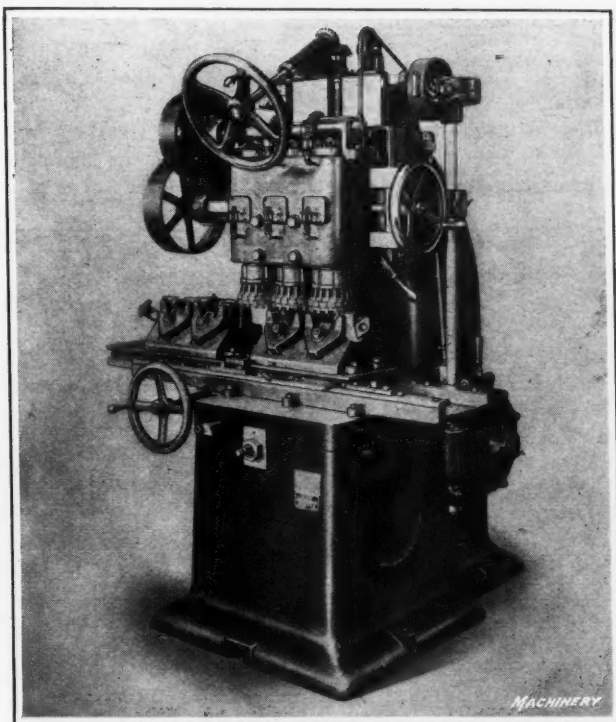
Three-spindle Profile Milling Machine built by the Automatic Machine Co.
